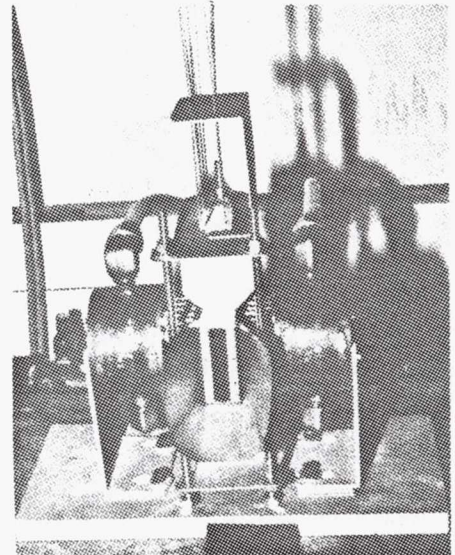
Starfish Pocket/Radiant Heater Test Fixture
